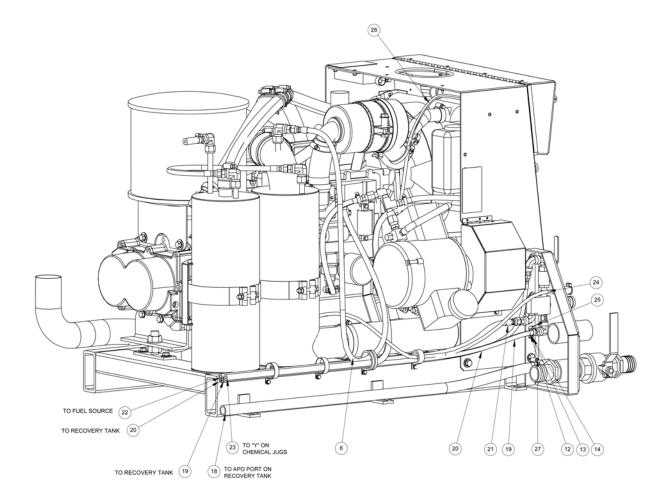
Machine Assembly - Front View D-5256 Rev D
